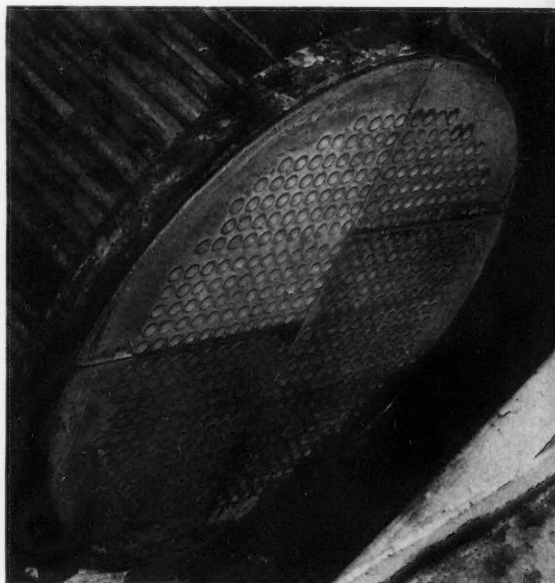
Tube sheet on channel end of debutanizer charge exchanger showing corrosion before application of inhibitor.
